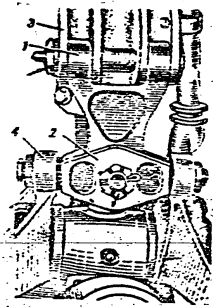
GENERAL VIEW OF UNIVERSAL JOINT AND CROSSPIECE OF L.S. SIDEWHEEL STRUT (ARROWS SHOW BOLTS SUBJECT TO REMOVAL)
